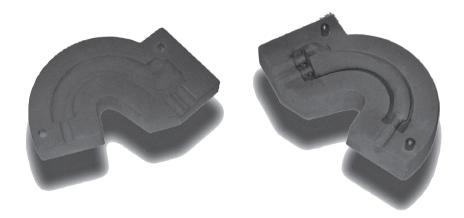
Sand molds produced through three-dimensional printing. Source: Courtesy of 3D Systems.
